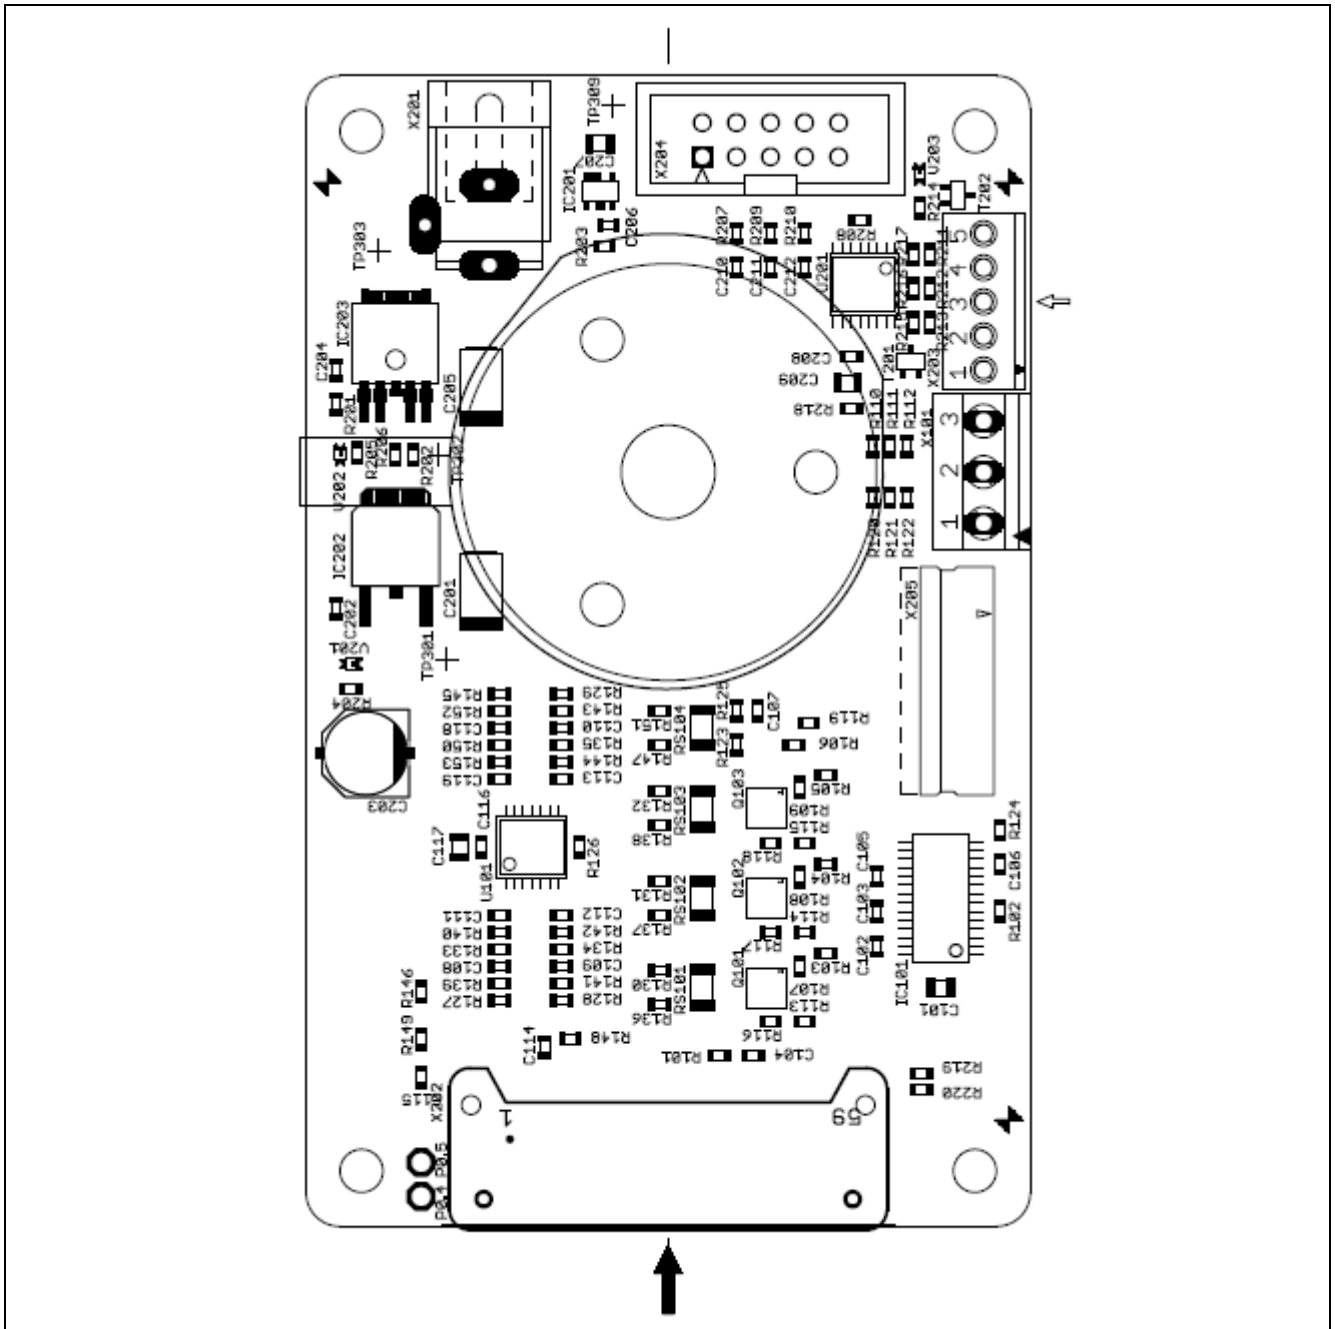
PMSM Low Voltage 15W Motor Card layout and geometry
